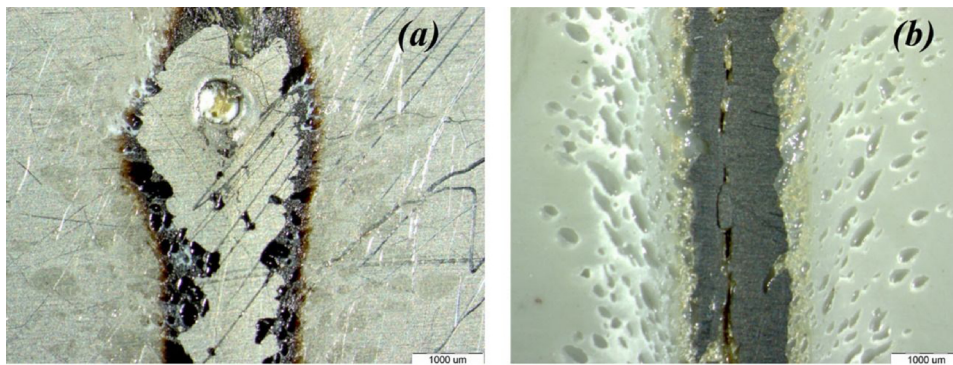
The detached surface appearance after welding in test 2: (a) stainless steel 304, (b) ABS.
